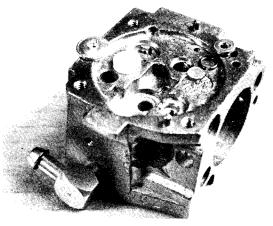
Plugs, Plastic Insert and Screen Removed
